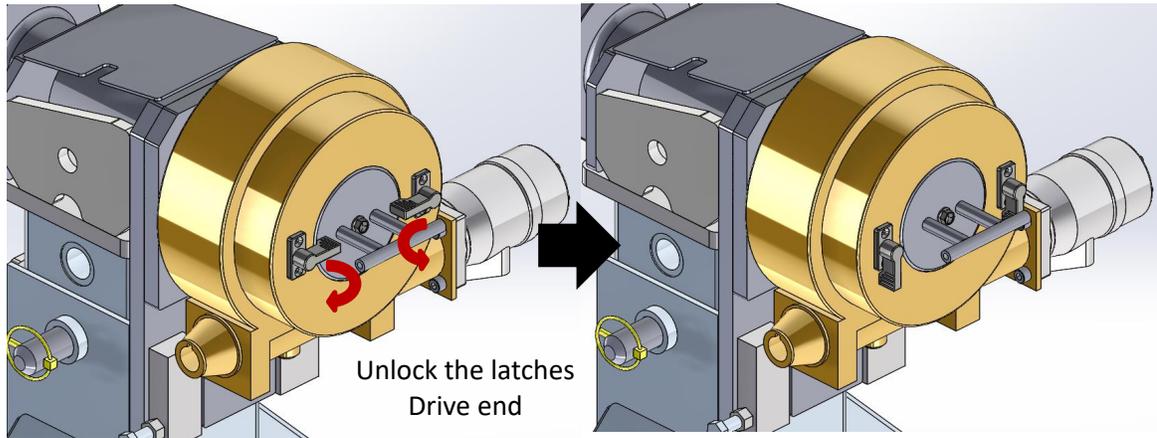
Operating Procedure for Welding Fixture Changeover, Unlock Safety Latches, Drive End
